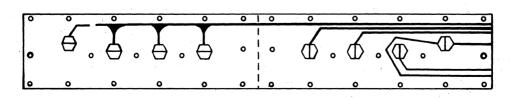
Full-Size Partial Drawing of the Flex-Circuit Layout Showing the Trace which Must be Cut if the Auto Reset Option is Desired.
